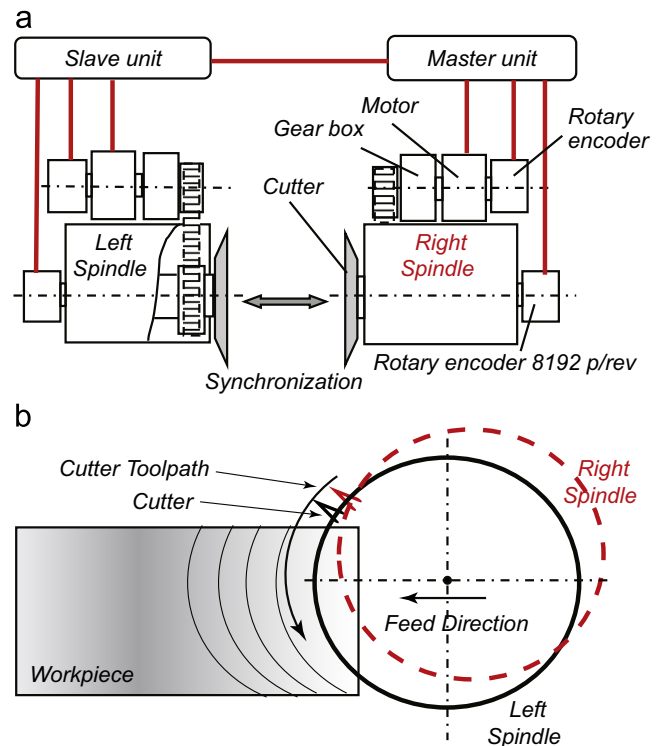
Double-sided milling control system and cutting experiment: (a) double-sided milling machine master–slave control system and (b) cutting experiment.
